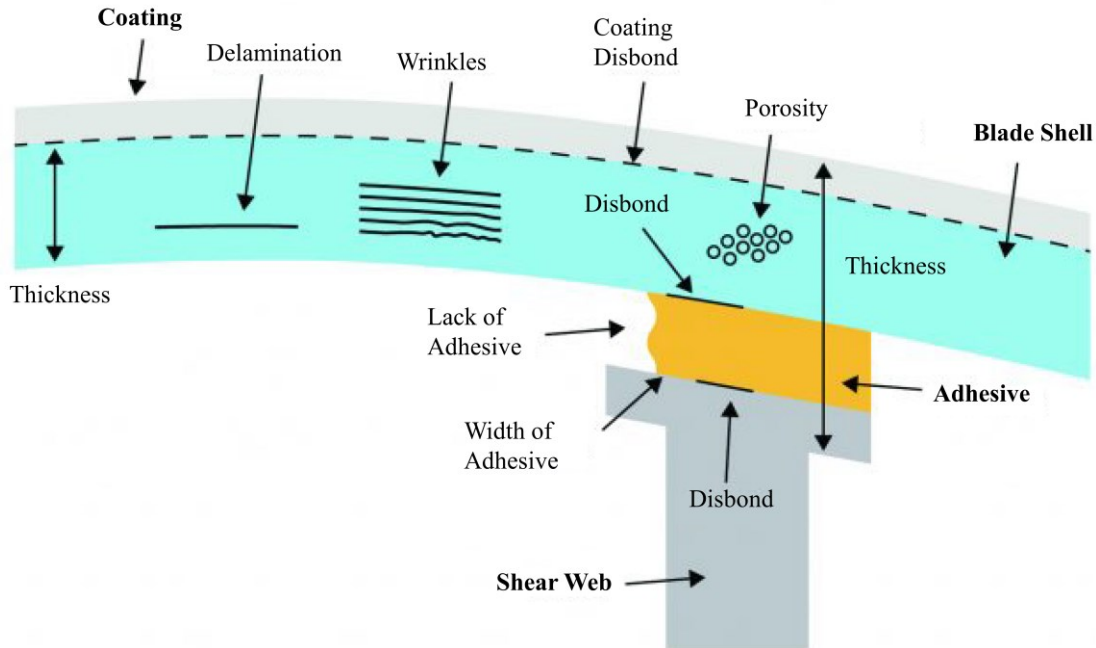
Typical damages located at blade shell and adhesive connections [12]
